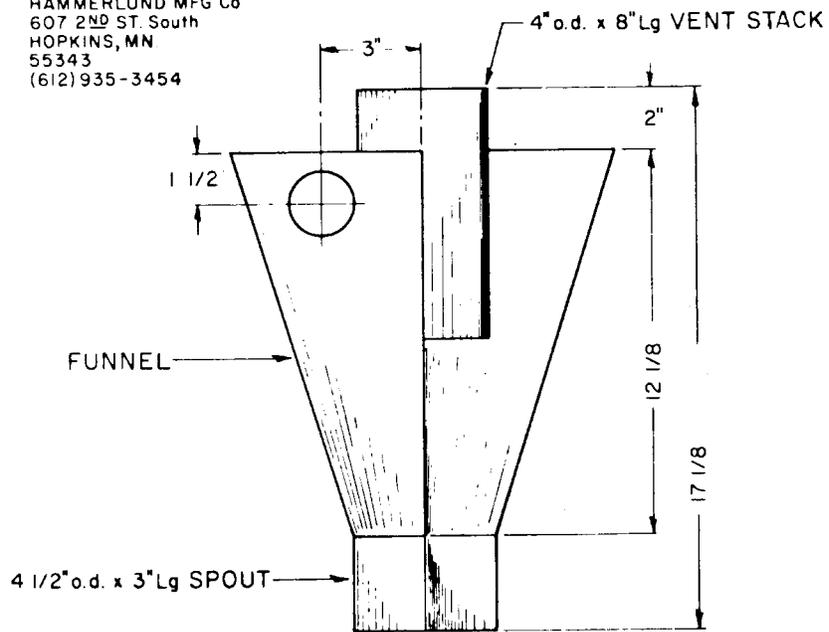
CYCLONE RECEIVER WELDMENT
